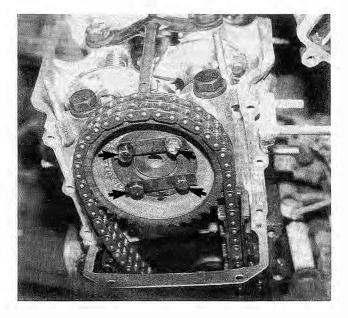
Camshaft drive sprocket mounting bolts (arrows). Sprocket shown with locking tabs.
